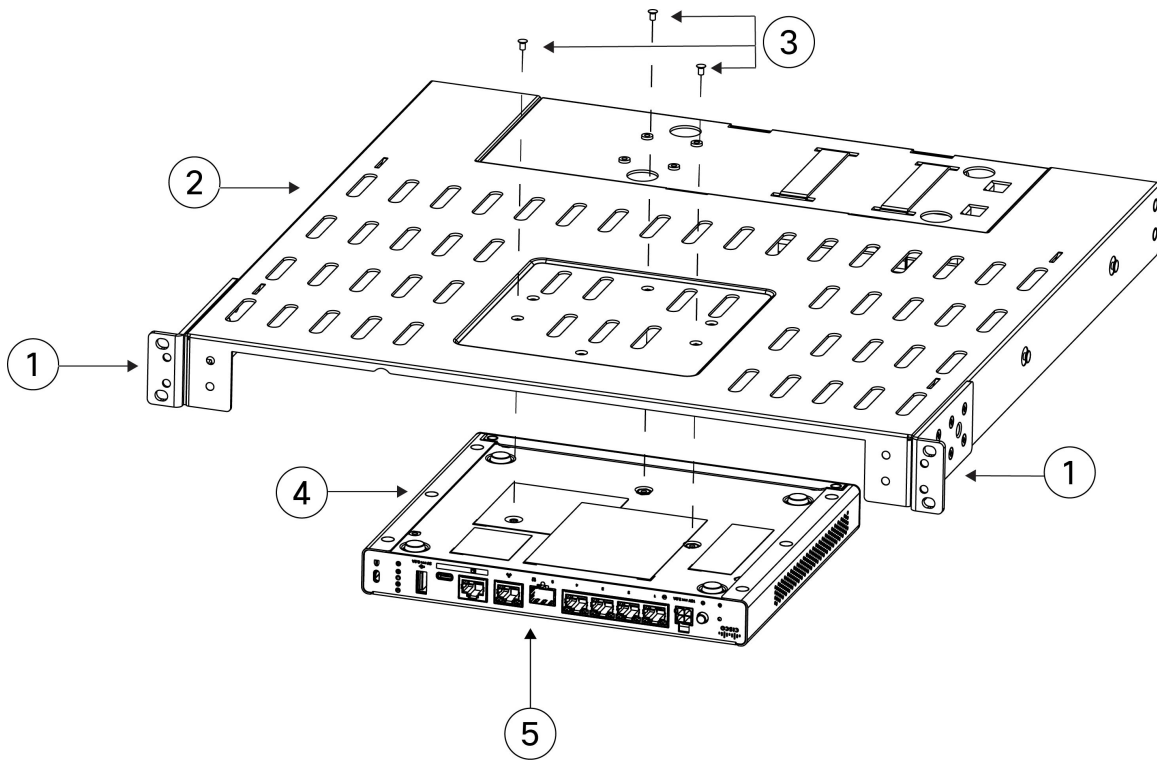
Install the two-post rack-mount brackets on the rack-mount shelf
